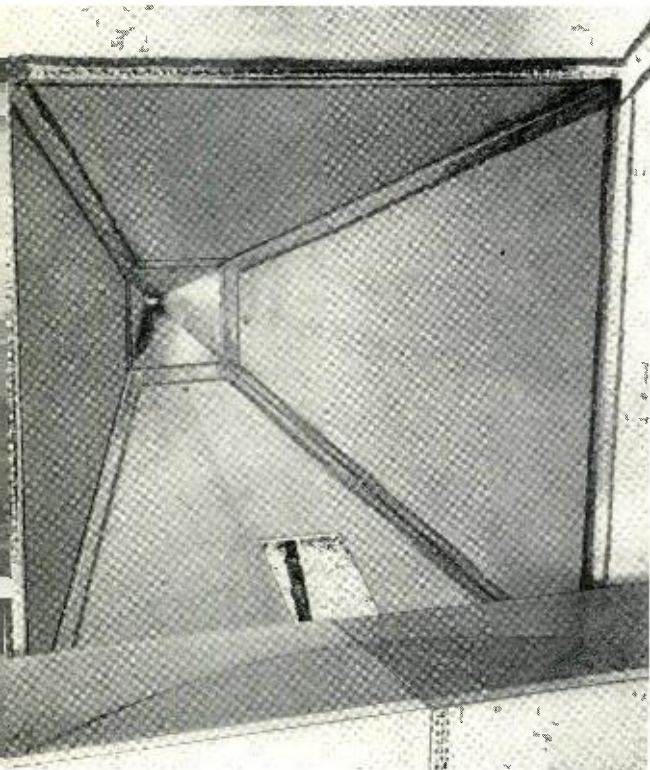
In this picture of a partly assembled TD-2 antenna horn, the dark stripes at the joints are putty. Putty is also applied over the outer edges of the joints.
